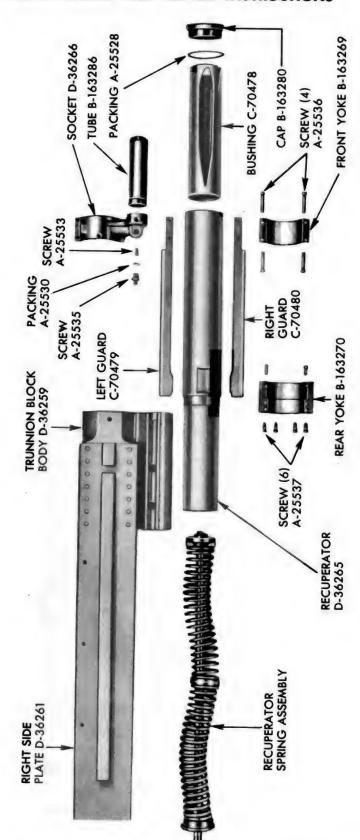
Recuperator and Recuperator Spring Assembly—Exploded View
